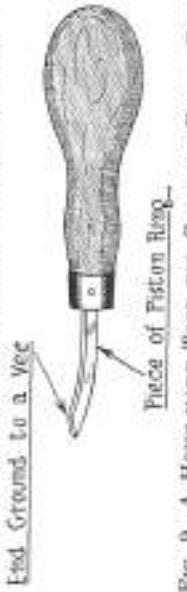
A HOME-MADE TOOL FOR CLEANING PISTON RINGS
